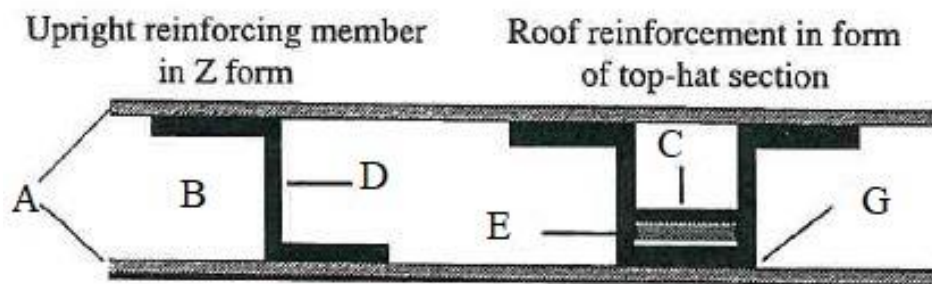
Internal reinforcement of sandwich panels (Heap, 2010).
